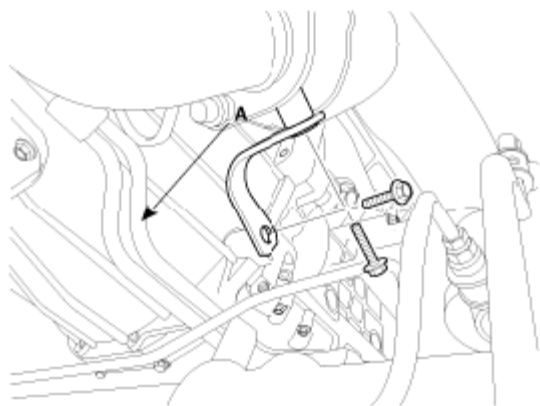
Identifying RH Exhaust Manifold Stay Bolt
